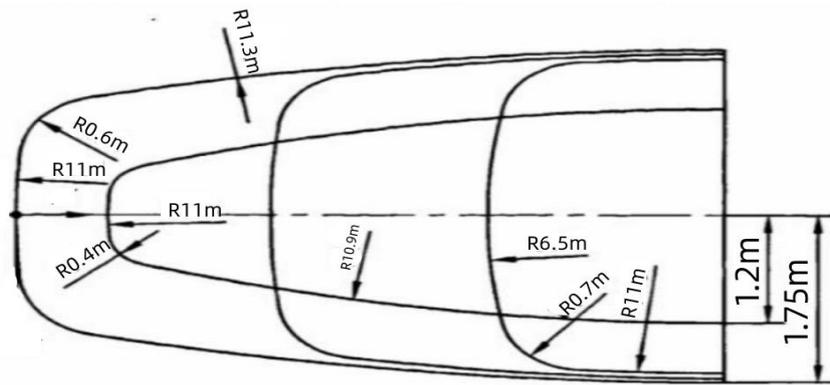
Sketch drawing of the cross-section shape of the train locomotive
